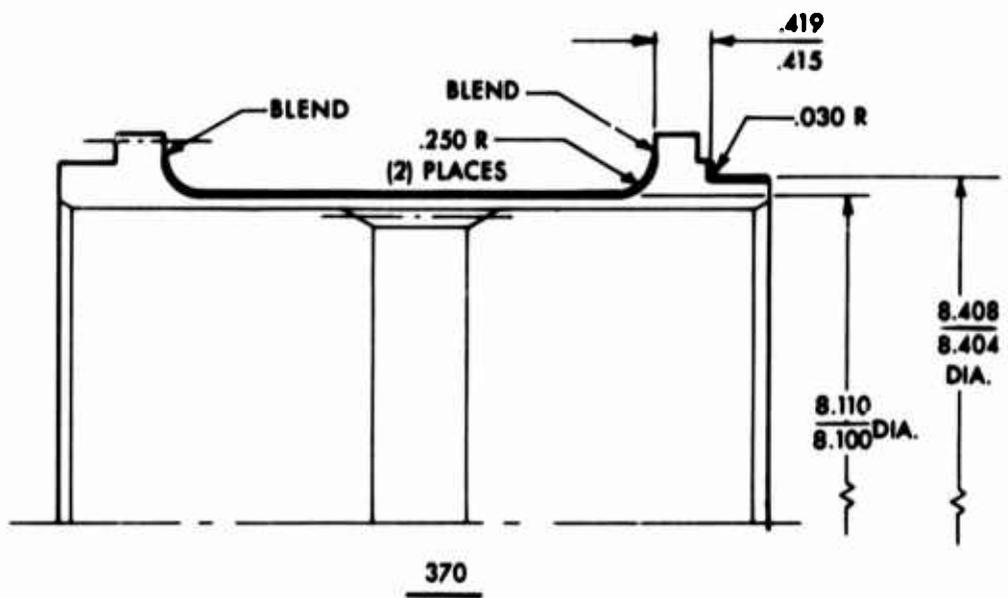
RG351-11183-041, Machine Operation Drawing.
